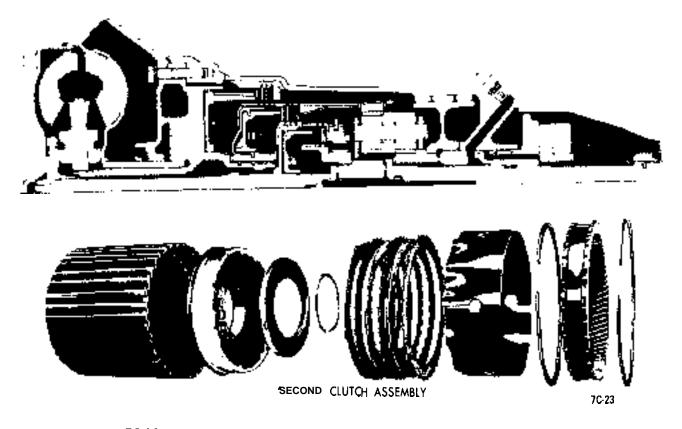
C-23 Second Clutch Drum. Piston, Springs, Clutch Plates, Spacer And Ring Gear
